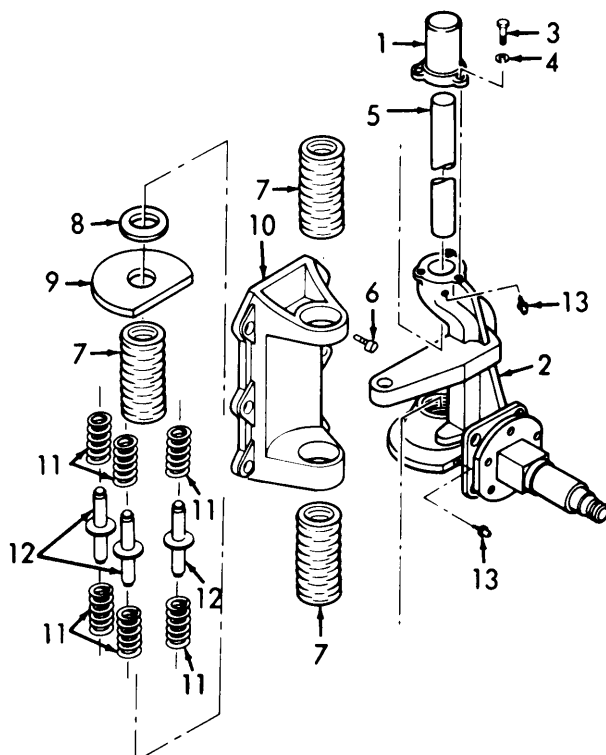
Shock Absorbing Spring Assembly, Disassembly.
